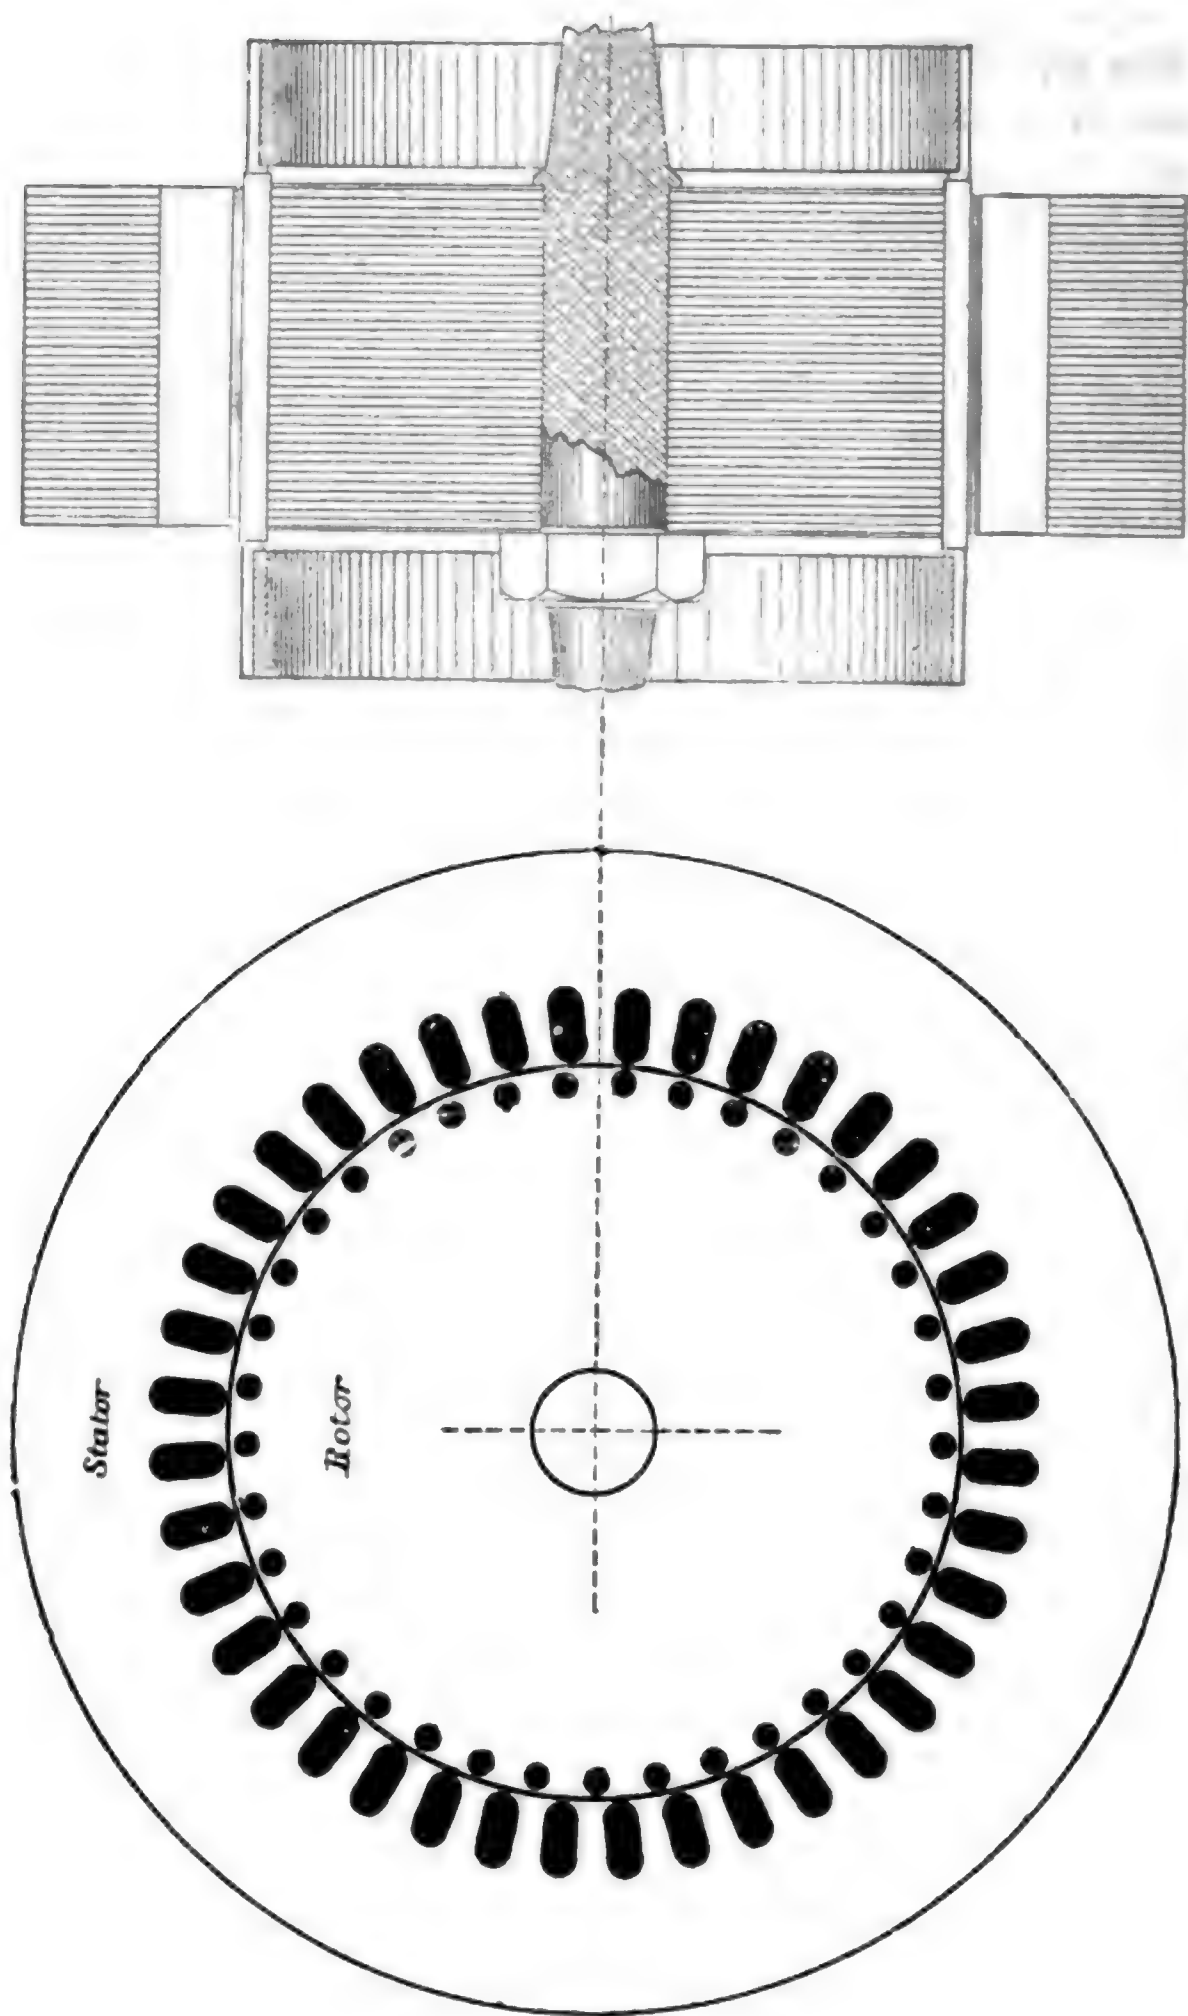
STATOR AND ROTOR STAMPINGS (BROWN).
